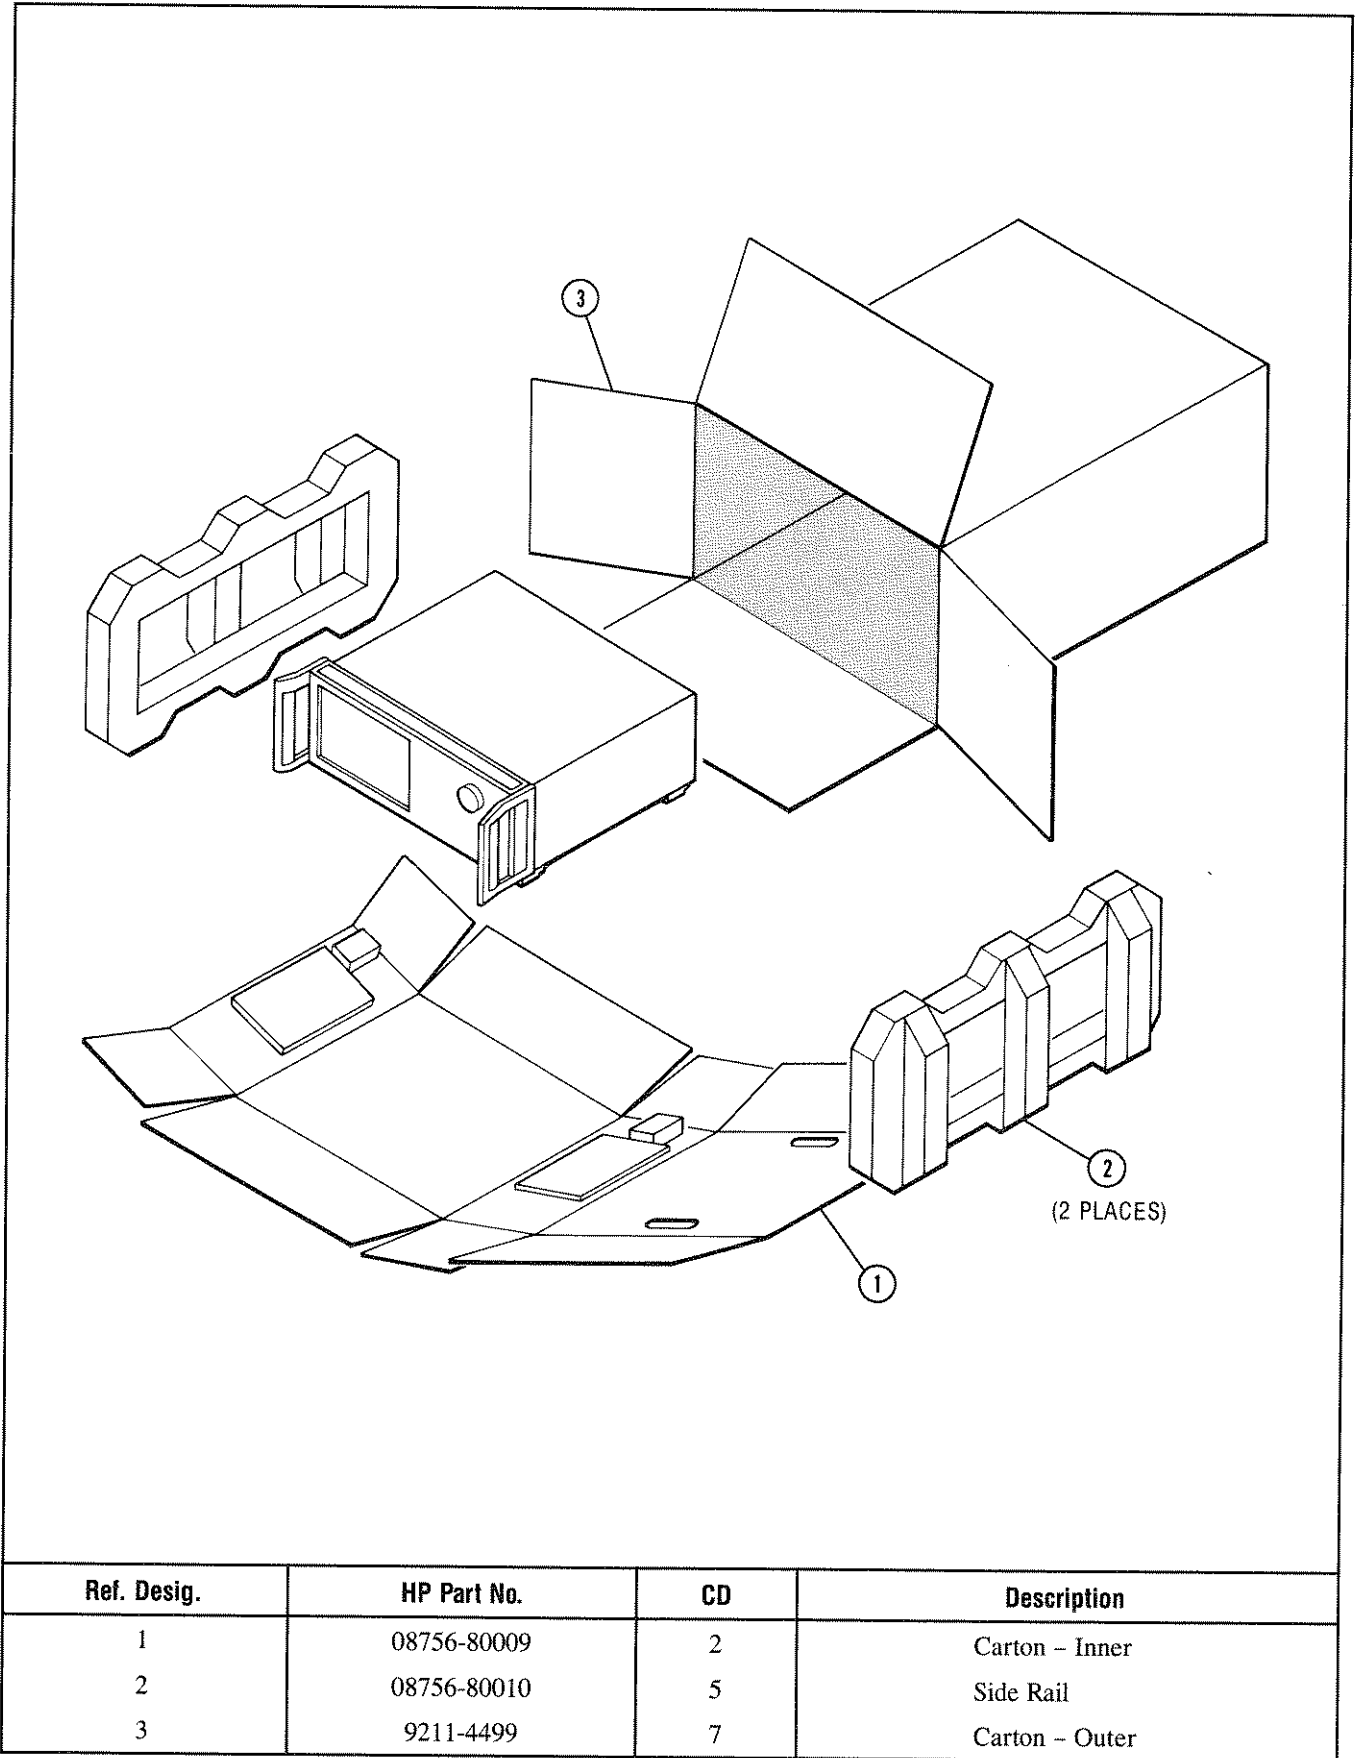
Packaging for Shipment Using Factory Packaging Materials
